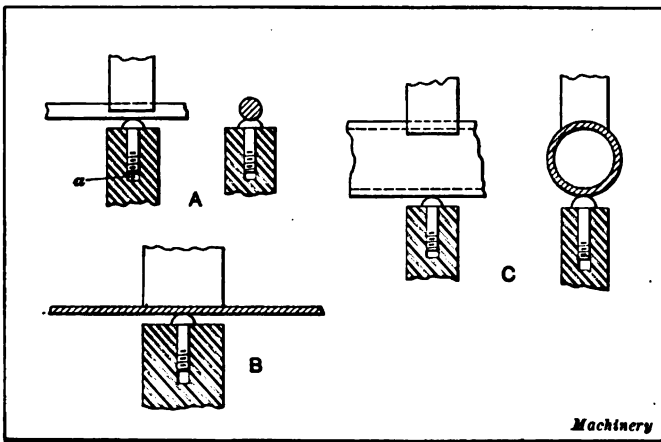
Diagram illustrating Processes of welding Screws to Sheet Tubing, etc.
